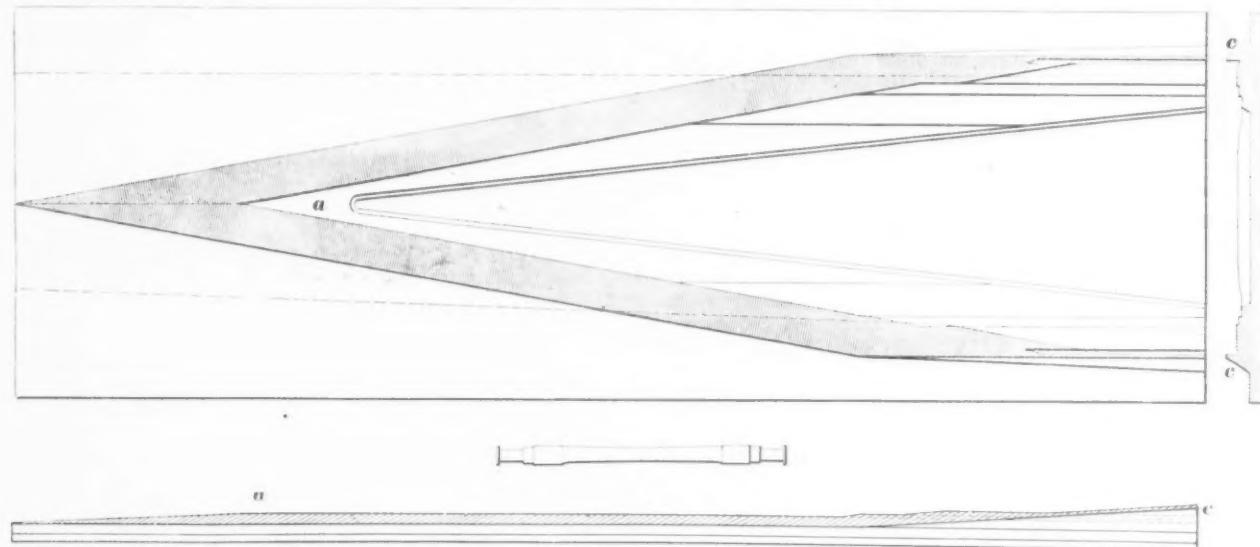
Plan, Elevation and Cross Section of a Die for a Car Axle, with Specimen of Work.
